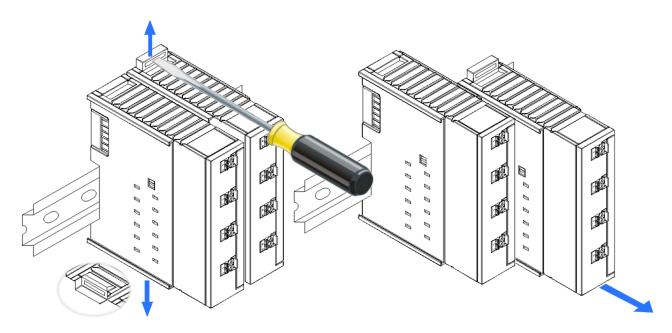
Opening of the upper and lower mounting rail lock and pull out the ELM terminal module
